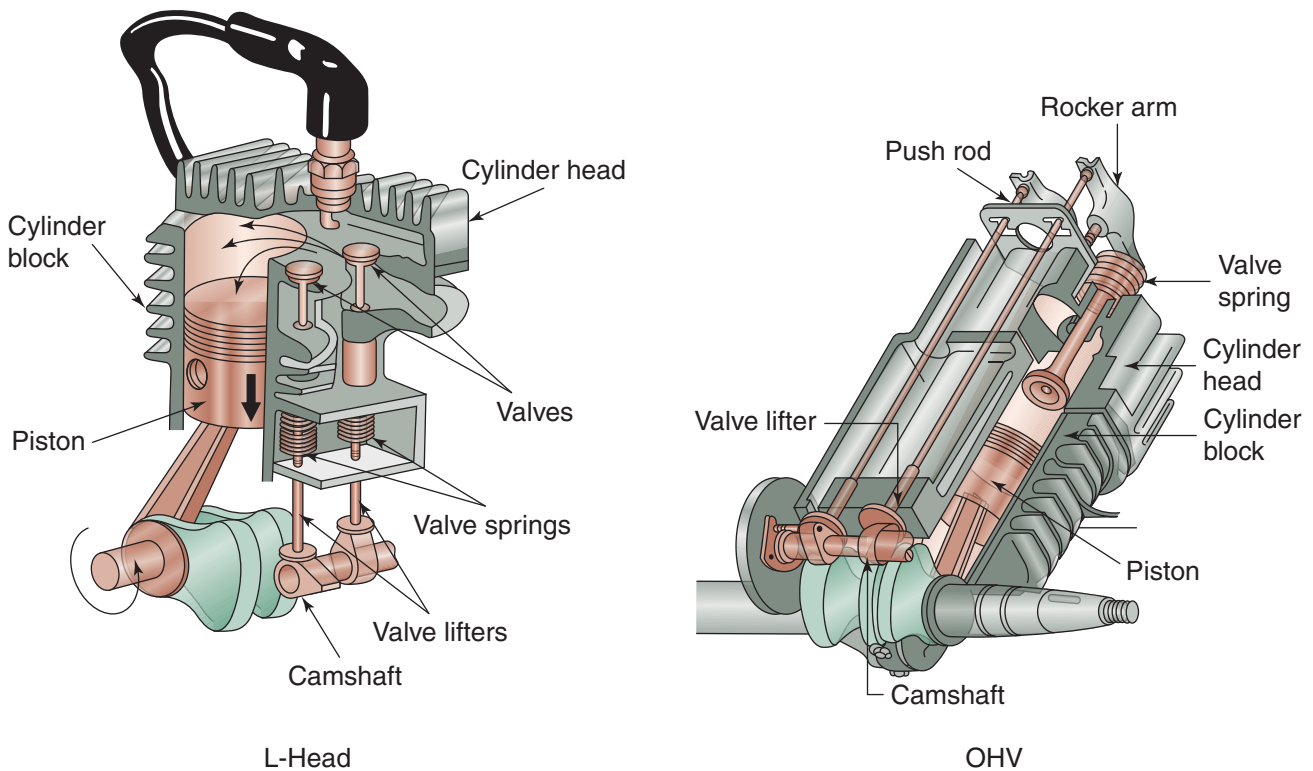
An L-head-type engine (left) and overhead valve (OHV) engine (right). Note that the valves are contained in the block on the L-head-type, whereas they're attached to the head on the OHV head.
